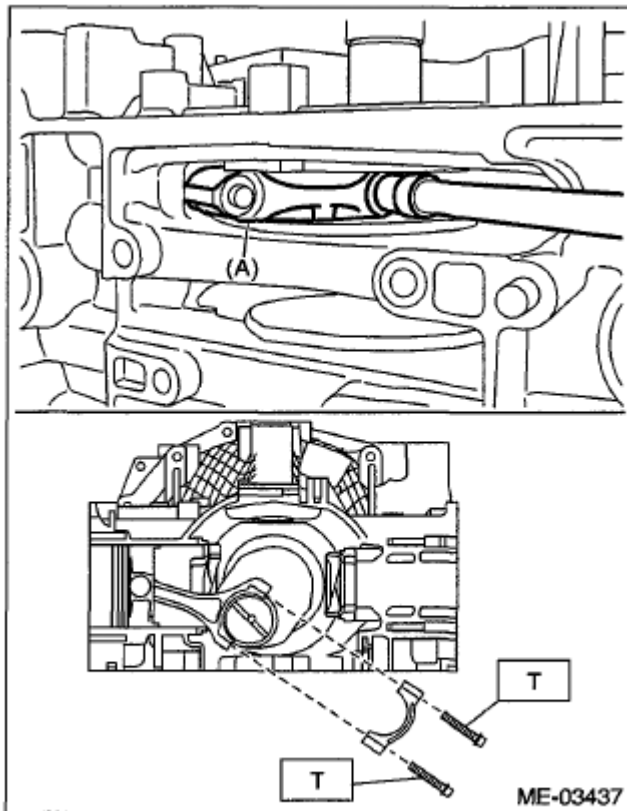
Identifying Crank Pin And #1 Connecting Rod
